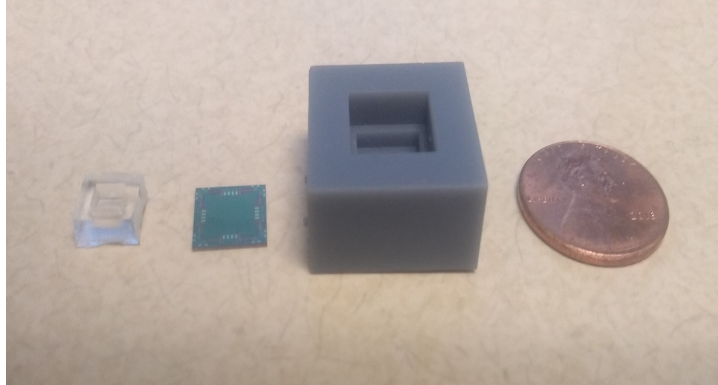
3D-printed alignment jig used for PDMS to MVI adhesion
